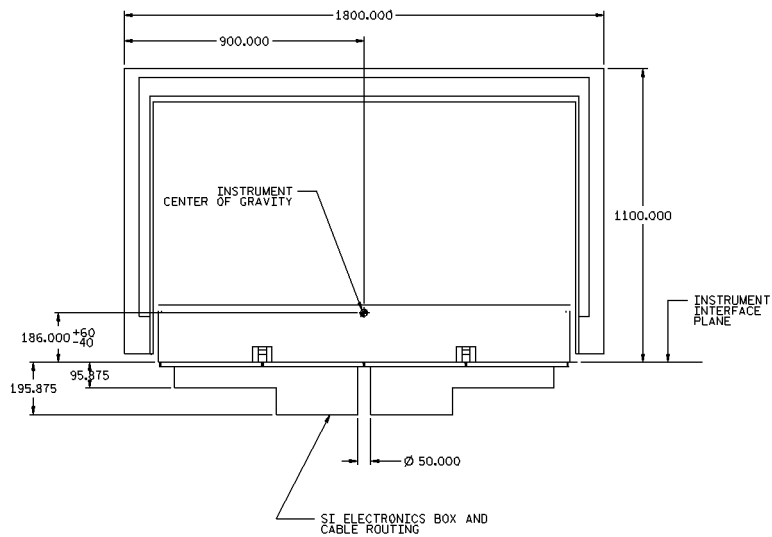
Elevation View of Primary SI (dimensions in mm)
